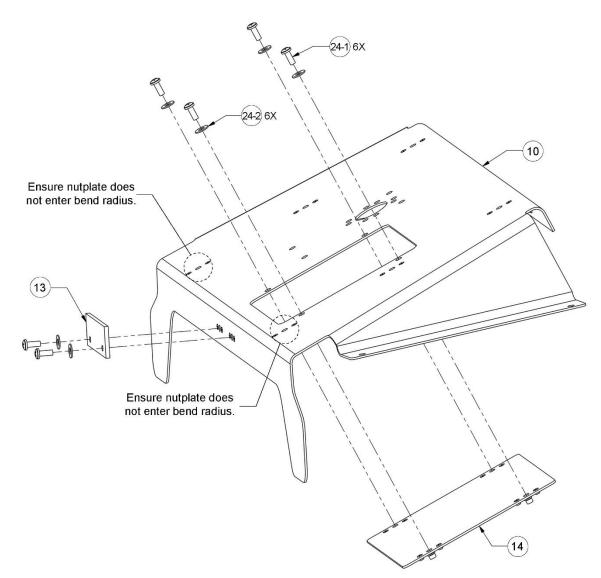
Inspecting Shelf Bracket and Attaching Rub Strip and Access Cover Plate
